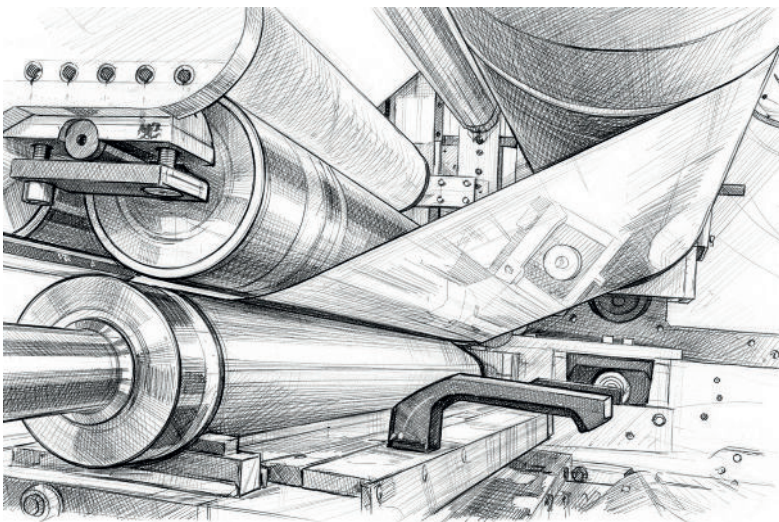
PGS™ coating unit, operating in kiss mode without a direct impression roller. Pressurized chamber enables stable slurry circulation and defect-free coating at speeds up to about 400 m/min.
